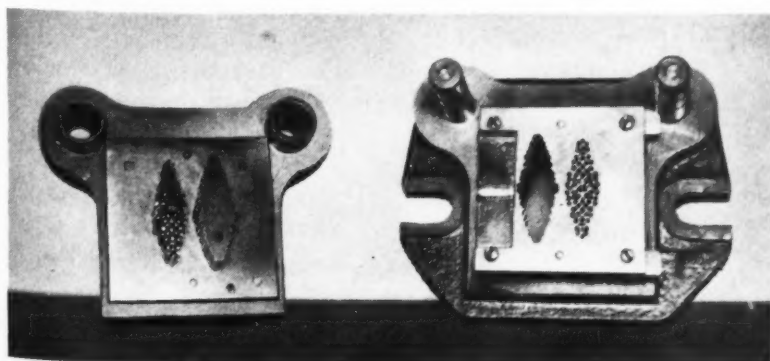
(Left) Upper and Lower Members of Die Used to Perforate and Blank over 100,000 Pieces Like the One Shown at B, Fig. 5
